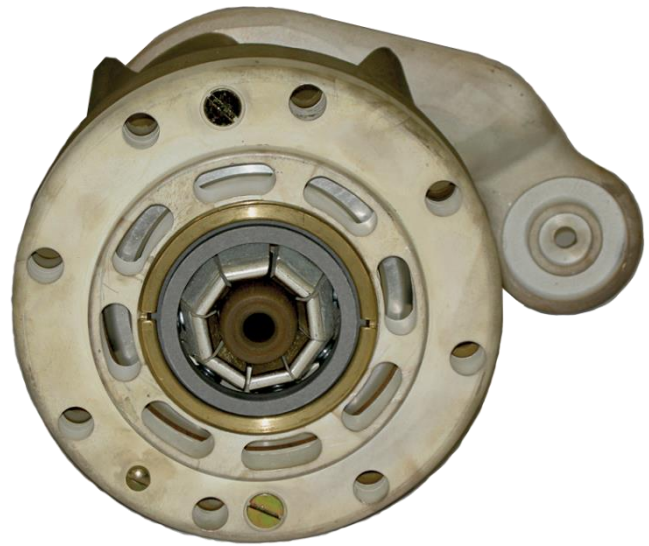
BZO6 40kA Cylinder and Contact Assembly
